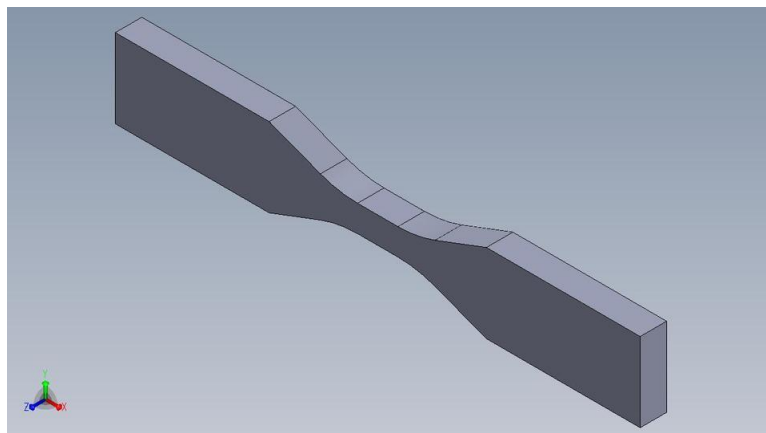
Type I ASTM D638 – 14 test specimen designed in AUTOCAD®.
